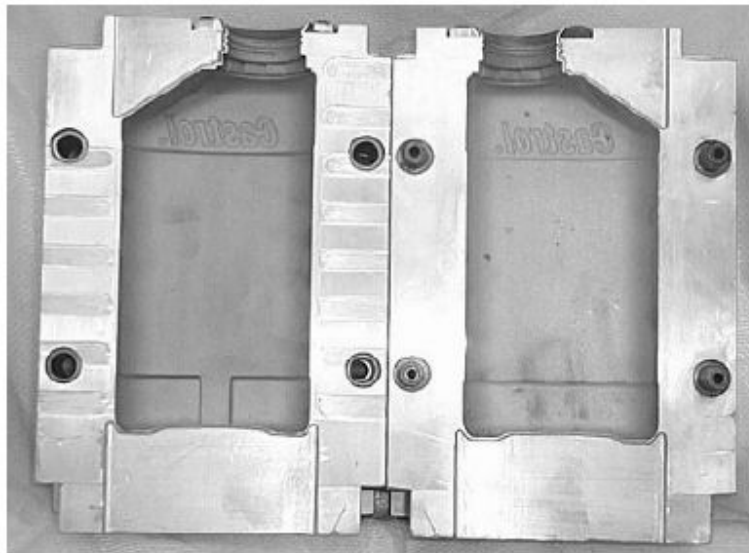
Quart-size bottle mold cavities for Castrol motor oil.
